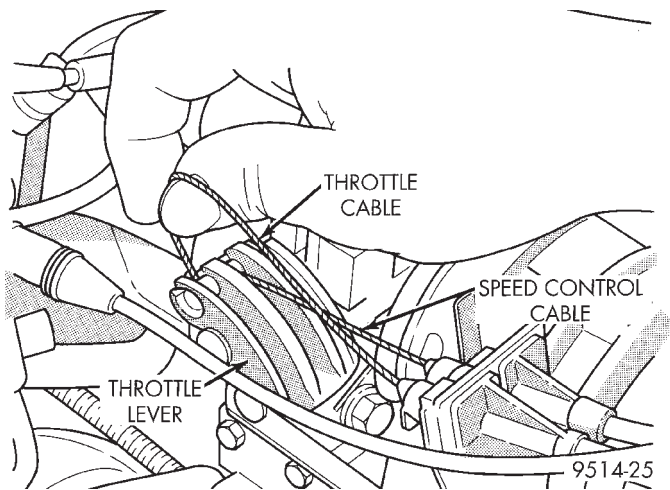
Throttle Cable Attachment to Throttle Body Attachment
